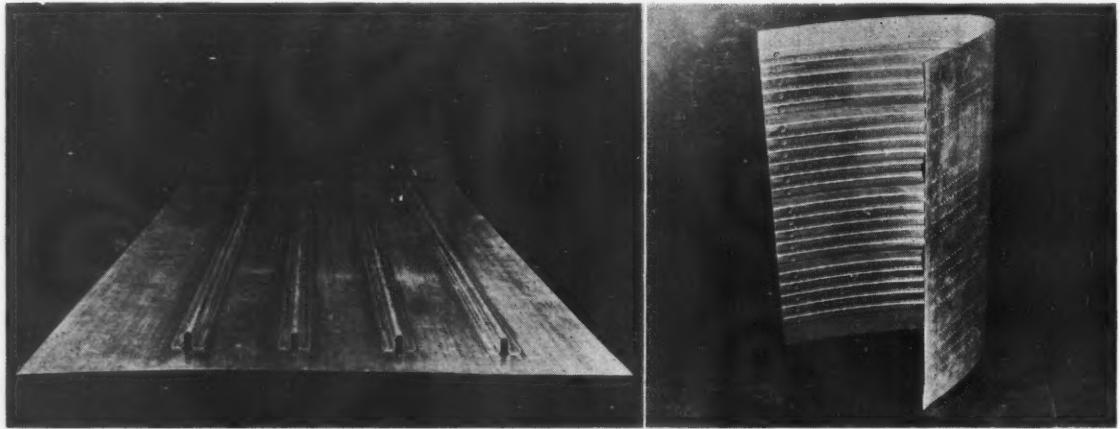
(a) spotwelded panel ; and (b) nose skin
